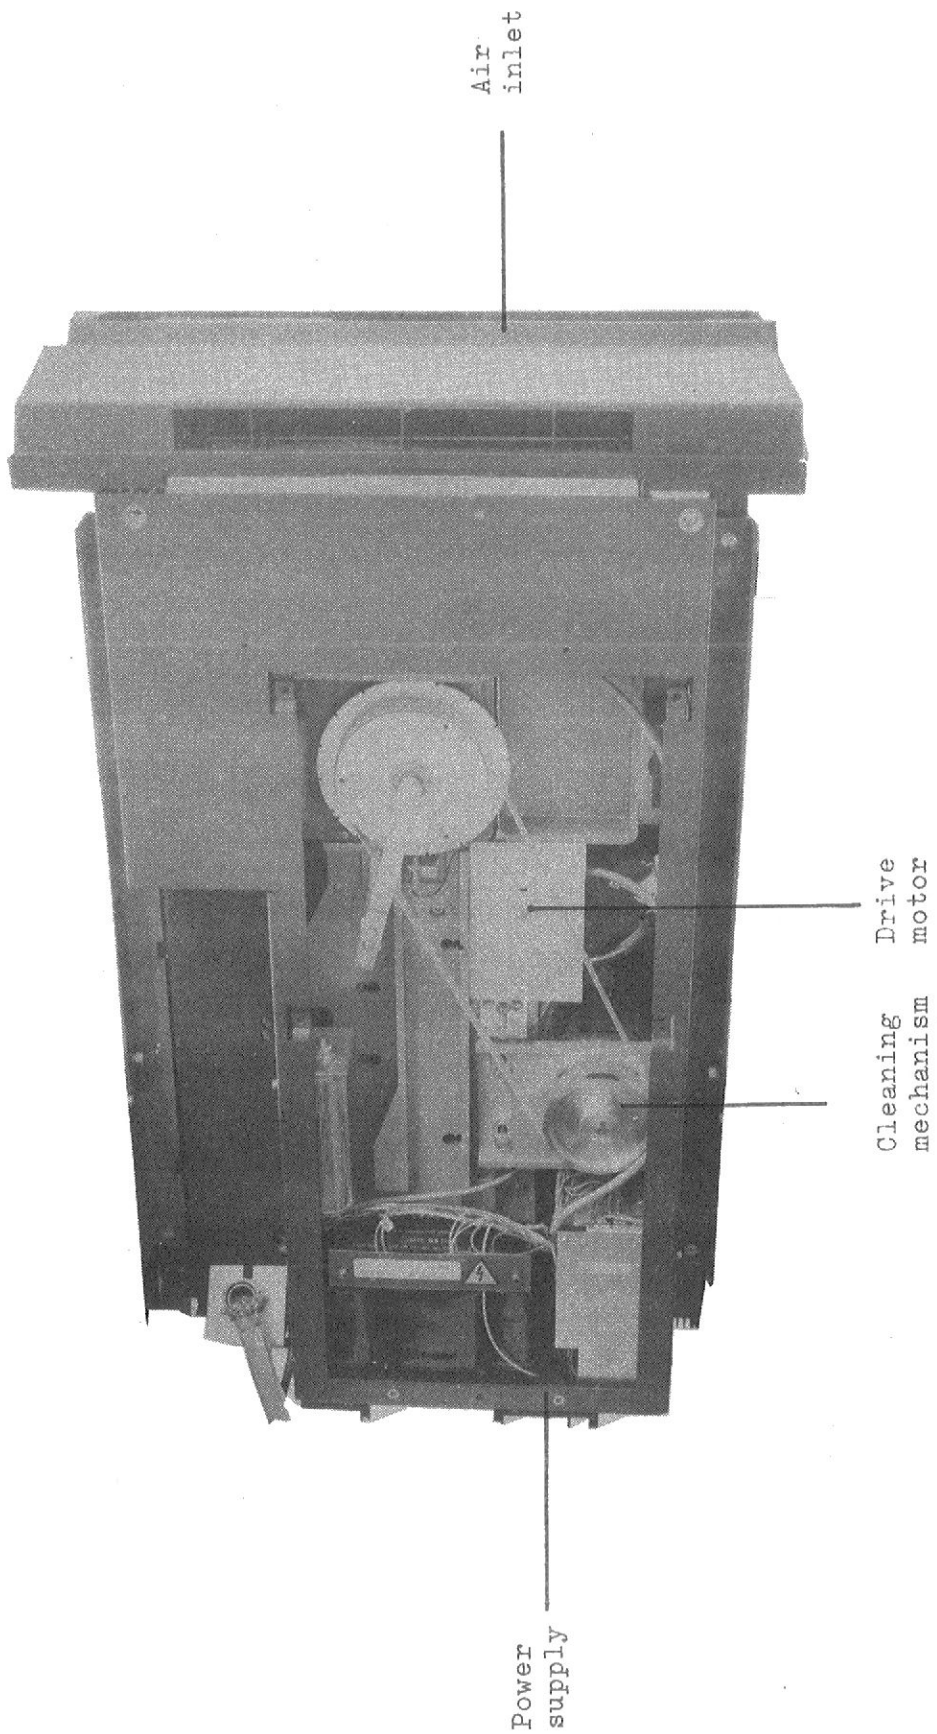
ASSEMBLY LOCATOR LOWER
